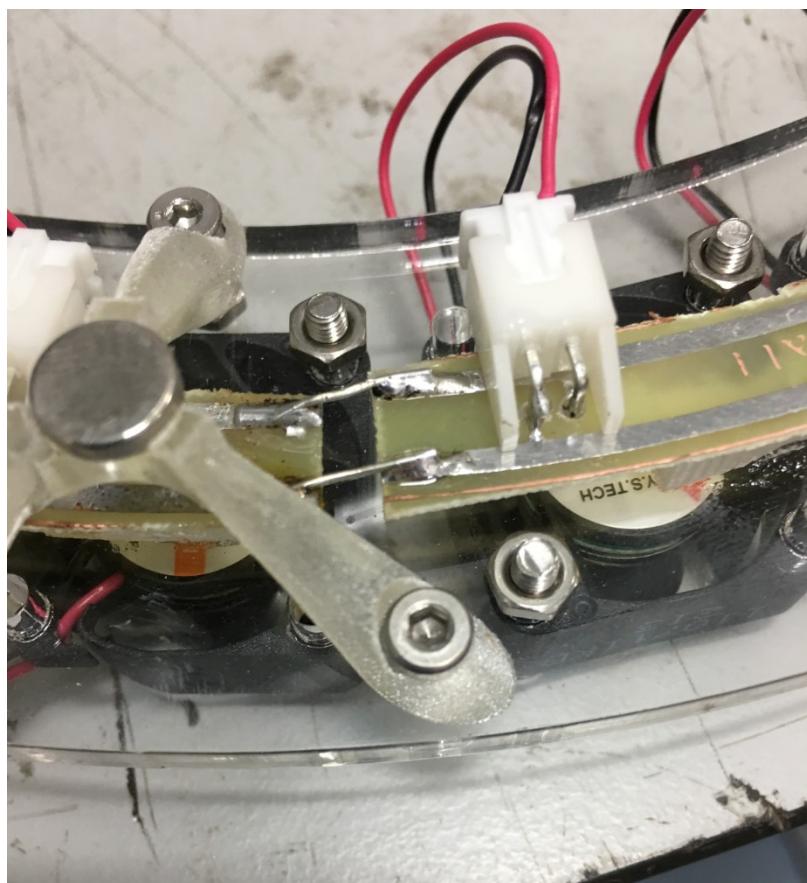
Joining the PCBs. Also, insertion of the fan female housing onto the male housing soldered to the PCB.
